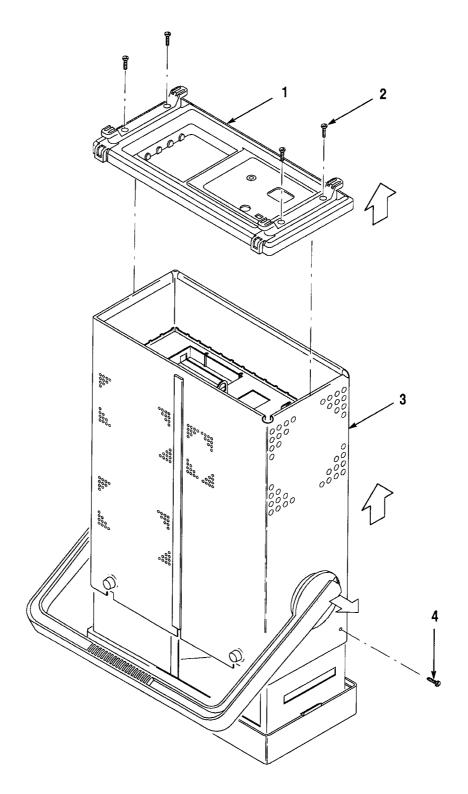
Oscilloscope Rear Panel and Cabinet Removal
